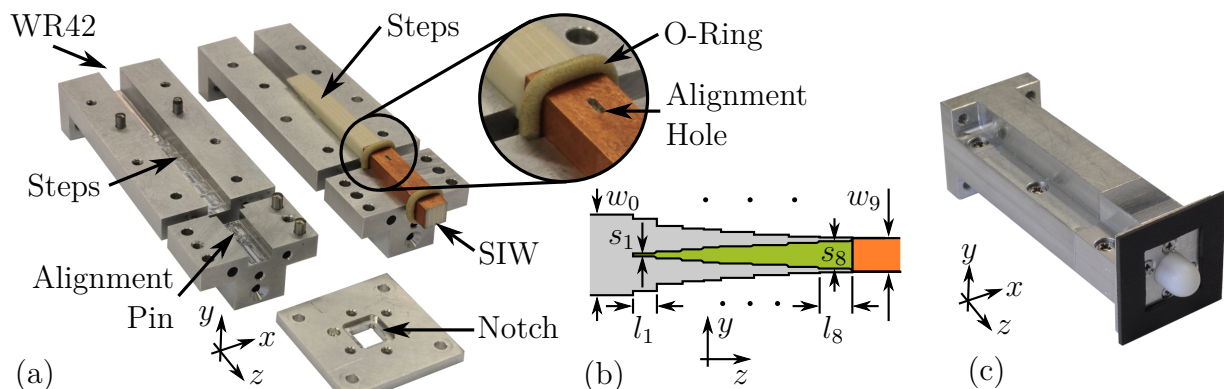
(a) Photograph and (b) cross-section of the test fixture. (c) Photograph of the assembled lens antenna.
